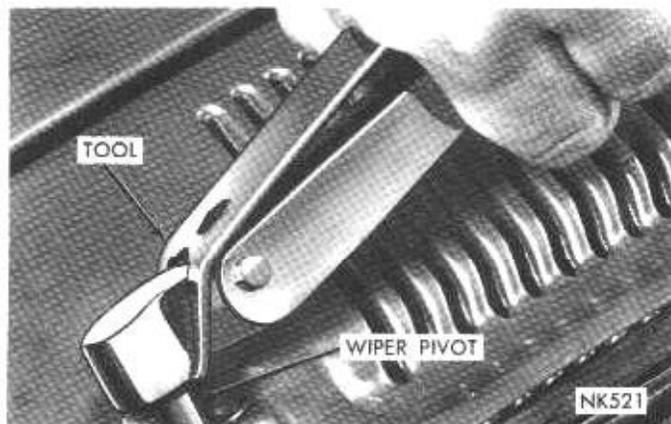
Removing Wiper Arm and Blade (Valiant, Barracuda, Belvedere and Satellite)
